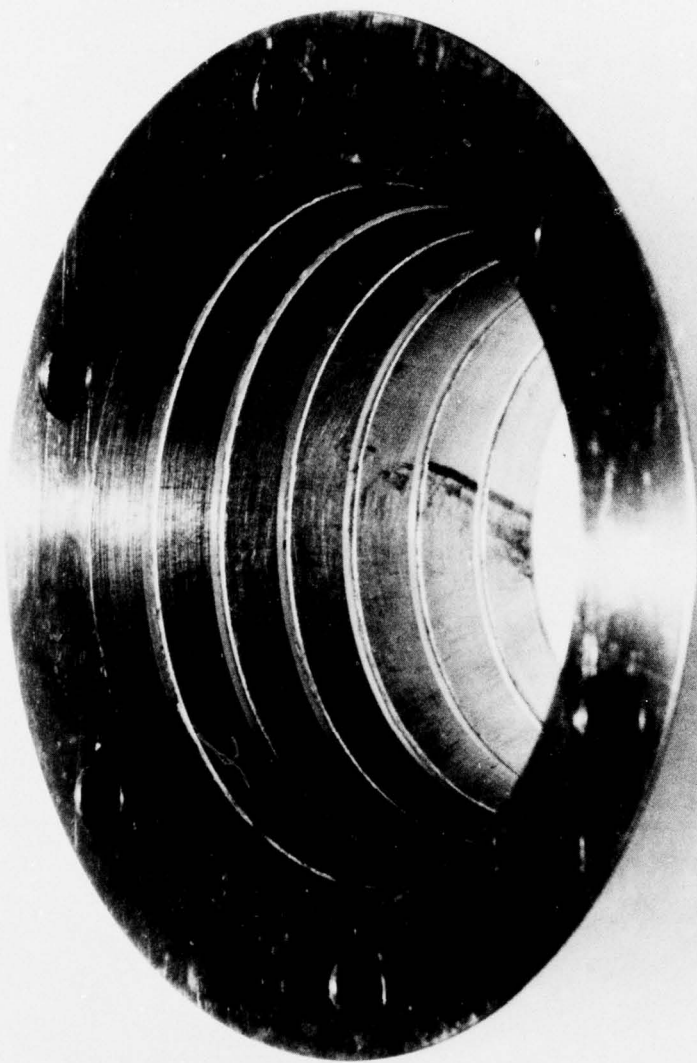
Seat with multiple O-ring grooves that generated the bearing cracks in figure 9.38.
